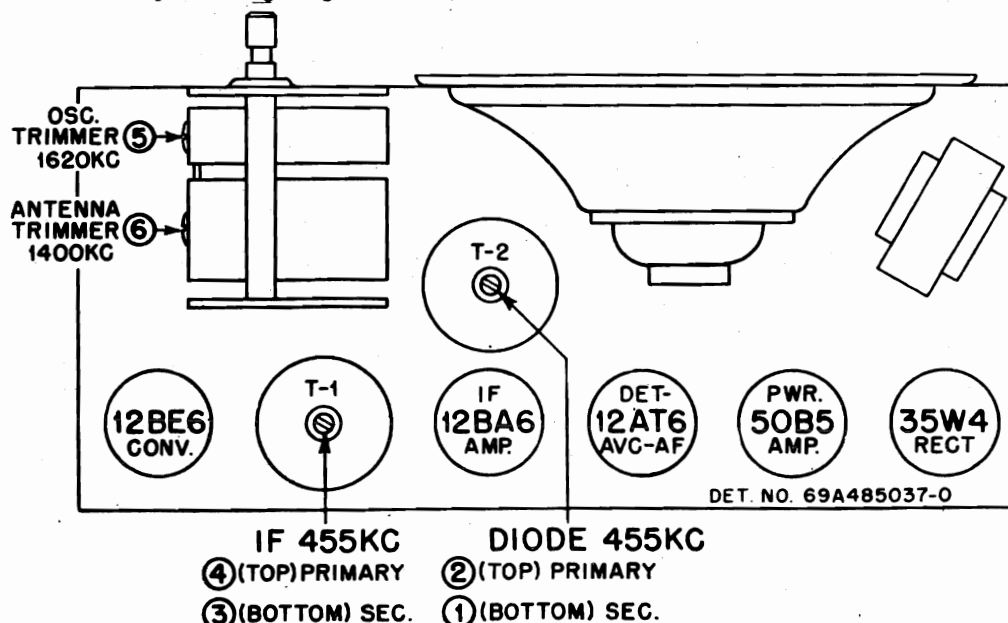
CHASSIS HS-116 TUBE & TRIMMER LOCATIONS
